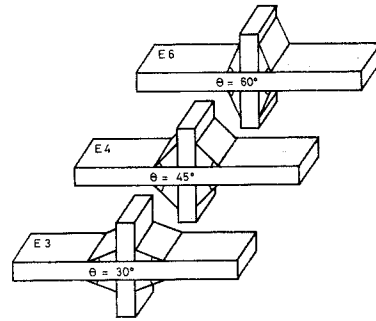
Fillet welded specimens with various fillet weld toe angles. (E-series specimens)
